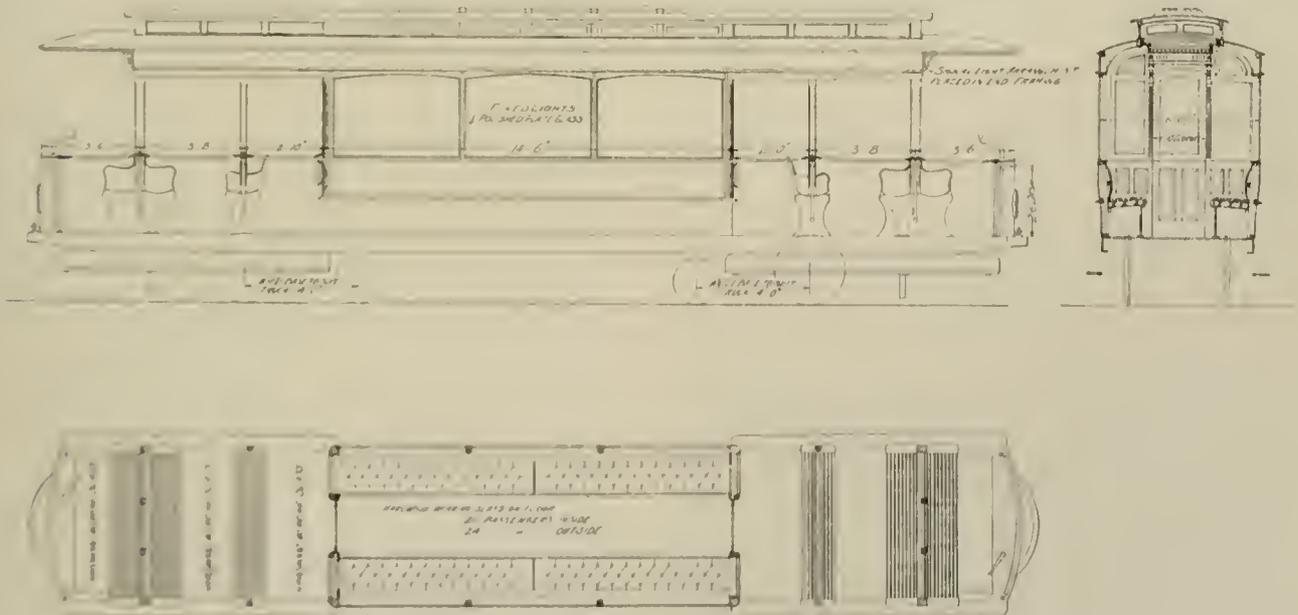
DIAGRAMS OF 8-WHEEL CALIFORNIA CAR BUILT IN ENGLAND.
